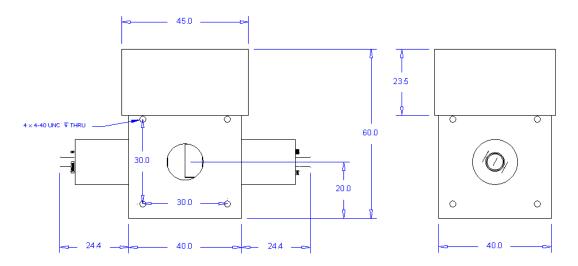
CUV Mechanical drawing. All dimensions are given in millimetres.
